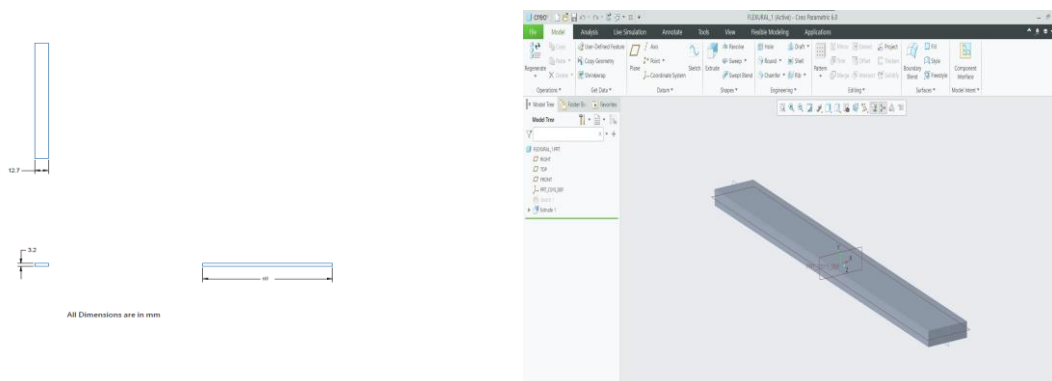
2D drawing and 3D CAD model of a rectangular specimen
